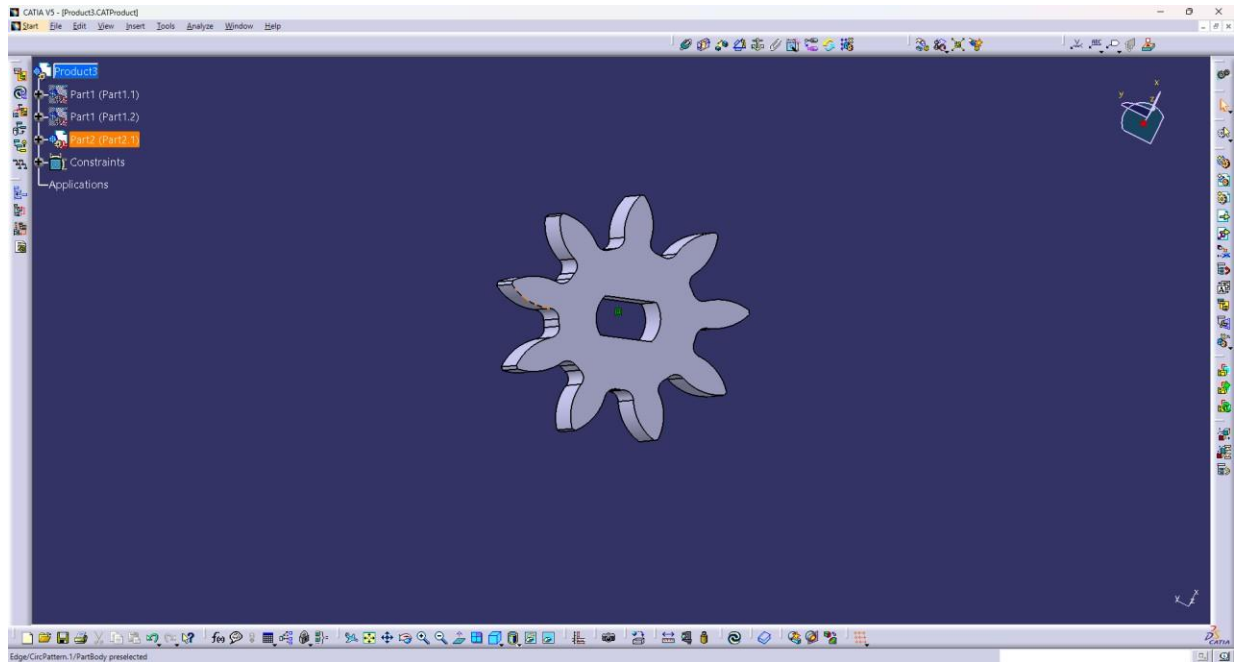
3D Printed CNC Plotting Machine- Parts
